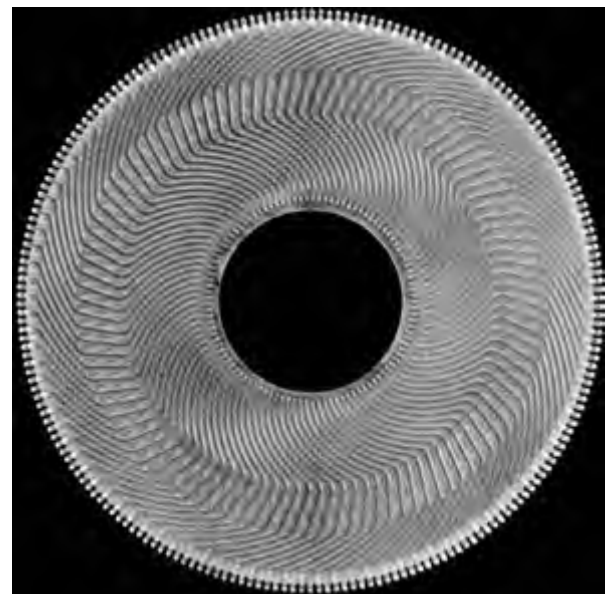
Pancake armature of a dc servo motor. Courtesy: Printed Motors Ltd., UK.
